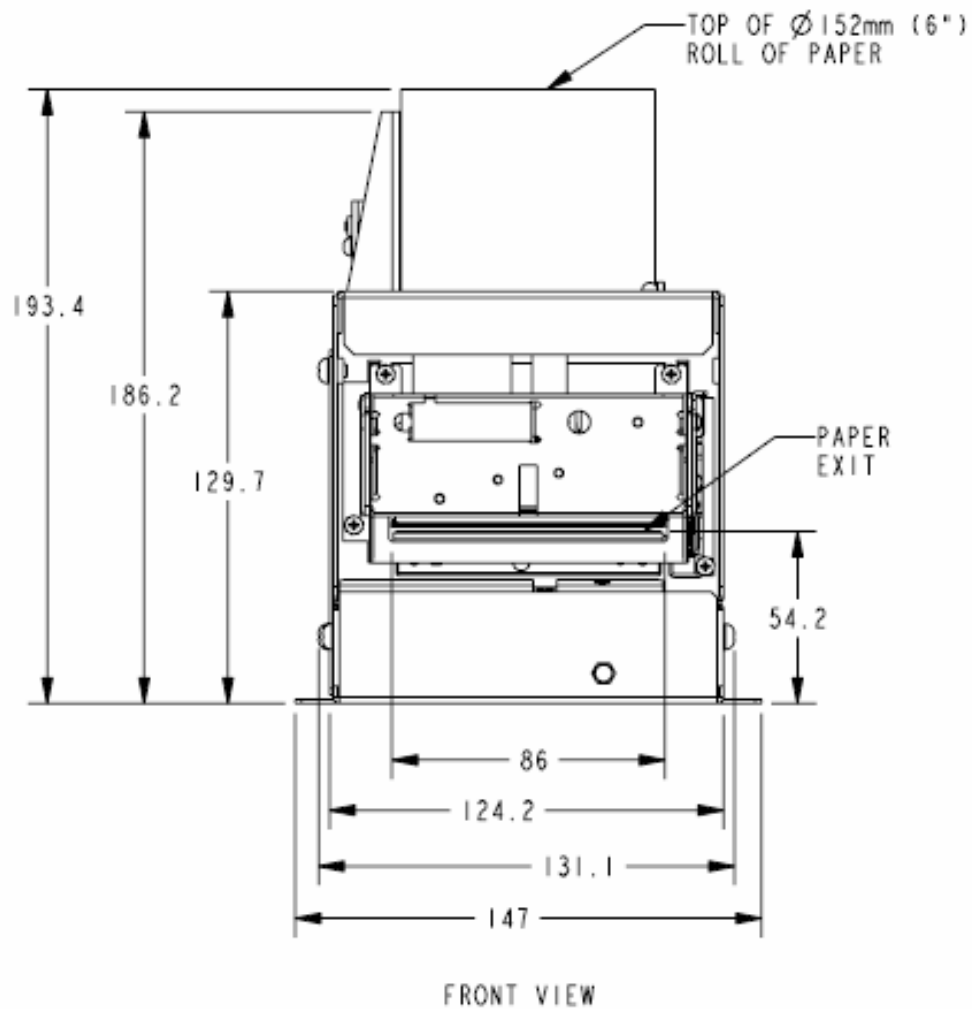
Mechanical Dimensions - High Speed Kiosk Compact Front View
